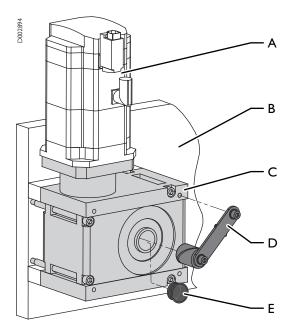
Blocking the drive pinions: Güdel gearbox unit
